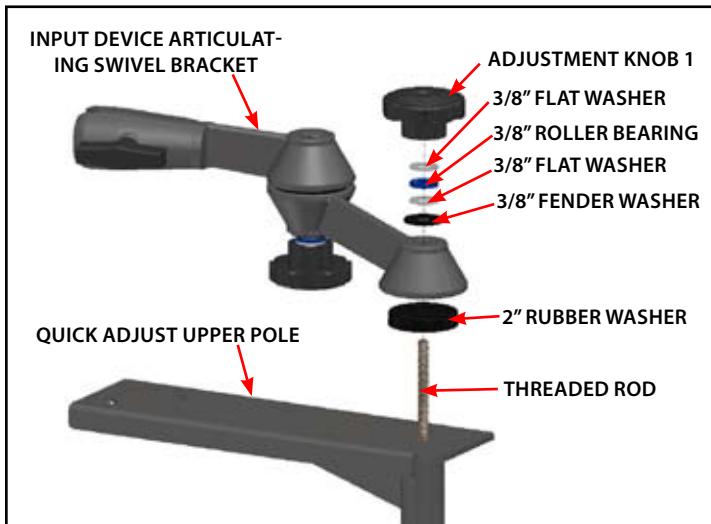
ADJUSTMENT SECTION ASSEMBLY
